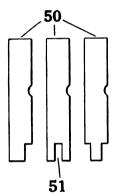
(Fig. 4, in patent abridgment.) Grant-Legros-Maw line-justifying machine. Type with special foot-nicks.
